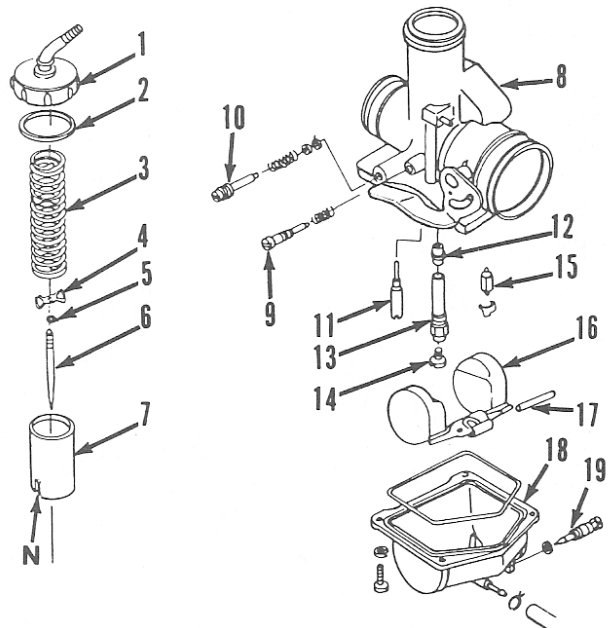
Exploded view of Keihin PW26 carburetor used on all models except for models specified in Fig. K7-6 and Fig. K7-7. Refer to Fig. K7-6 for parts identification.
